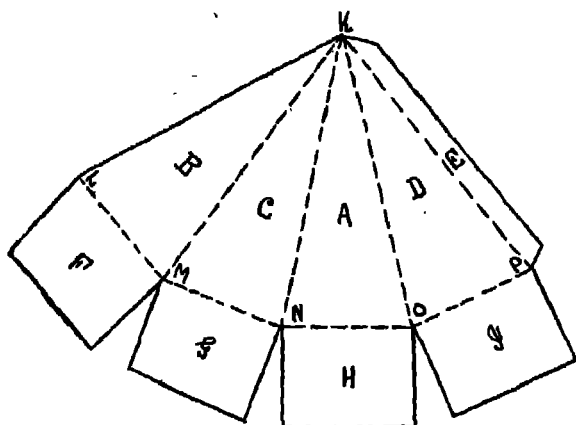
SINGLE-PIECE TRIANGULAR POINTED TABLE SALT PACKET.
